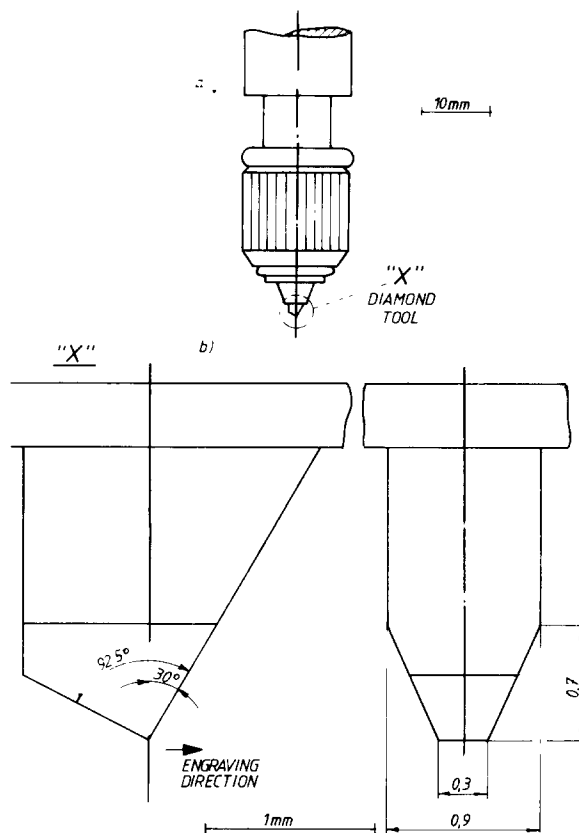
Engraving tool. (a) The diamond tool seen in the plotter tool holder. (b) Geometry of the diamond tool.
